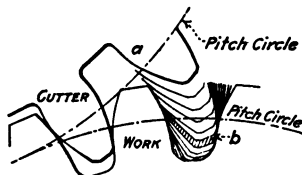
THE FORM-GENERATING PRINCIPLE OF FORMING GEAR TEETH
